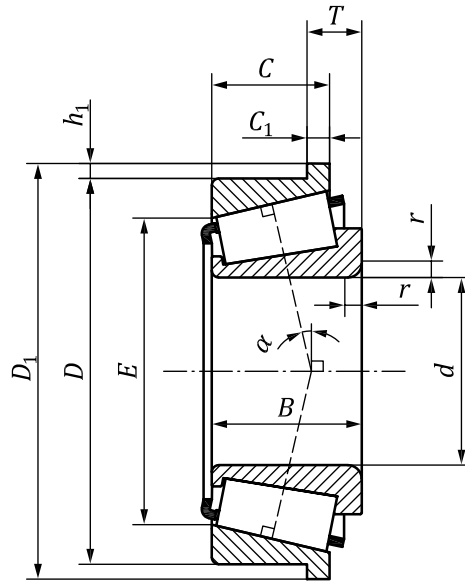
Single-row tapered roller bearing with flanged outer ring
